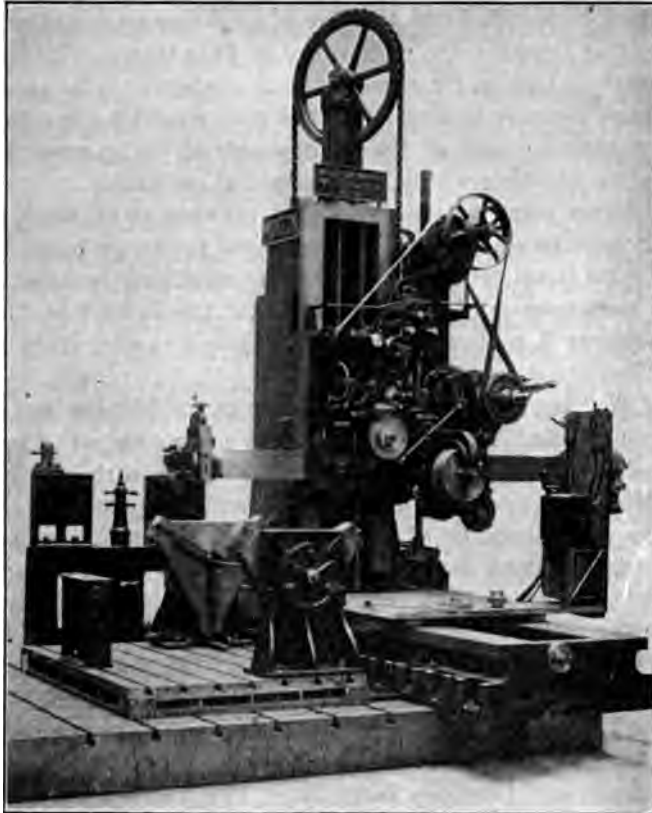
CYLINDER PLANER EXHIBITED BY MORTON MANUFACTURING COMPANY
